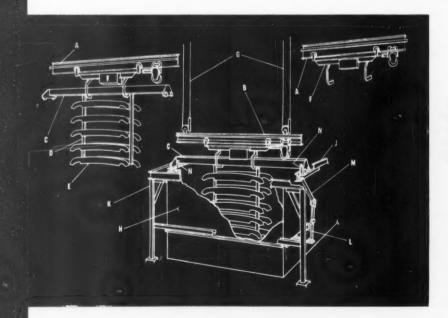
Schematic drawing showing method of loading racks in tank. Movable section of monorail track (B) is lowered, and loaded rack-carrier beam (C) is pushed off hooks.
